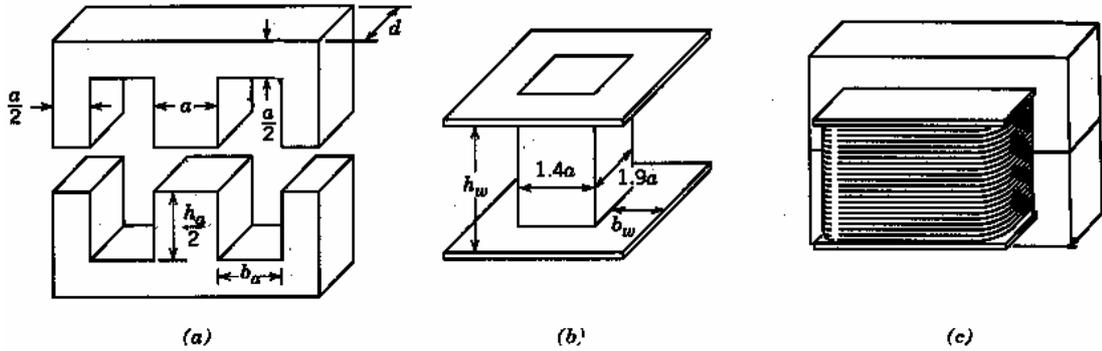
Double E-core, its bobbin and an assembled inductor
